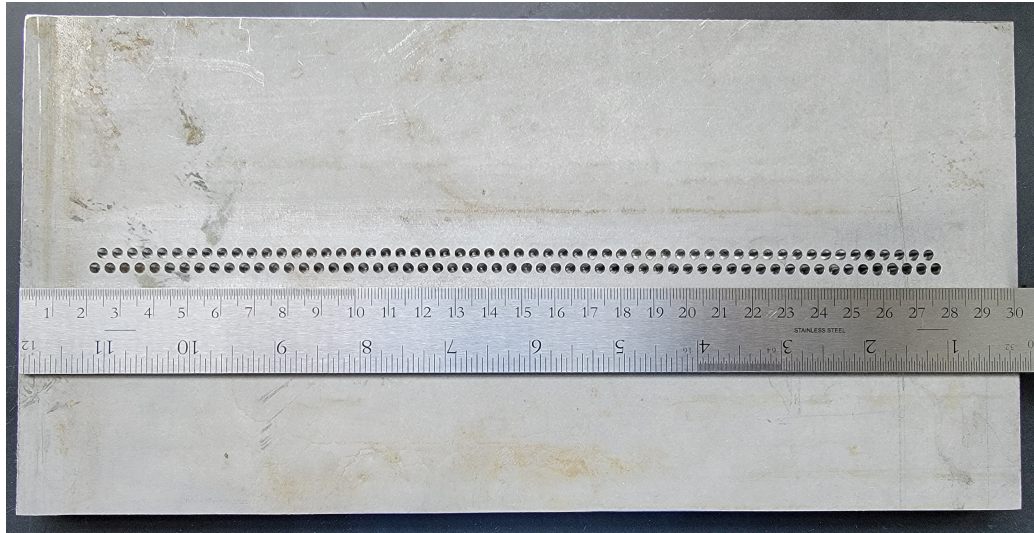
304L stainless steel plate with holes drilled so that corrosion resistant elements can be added via pellets
